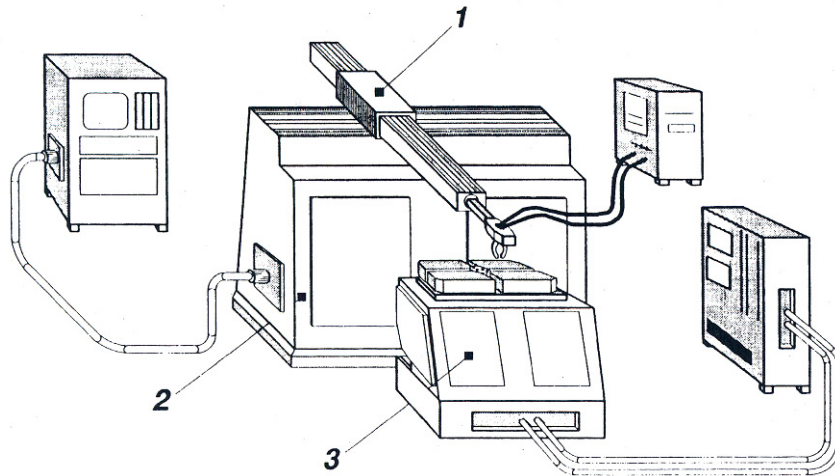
Linear motor driven welding robot. 1 - arm driven by two HLSMs in x - y plane, 2 - base, 3-table.
